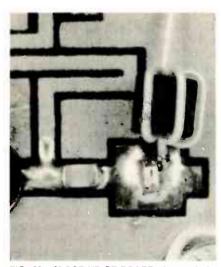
CLOSE UP OF BOARD shows choke L4 and small chip capacitor to its right. See text for details on soldering chip capacitors.
